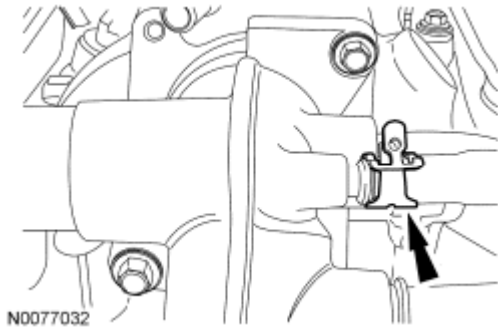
Locating Coolant Bypass Hose To Thermostat Housing
